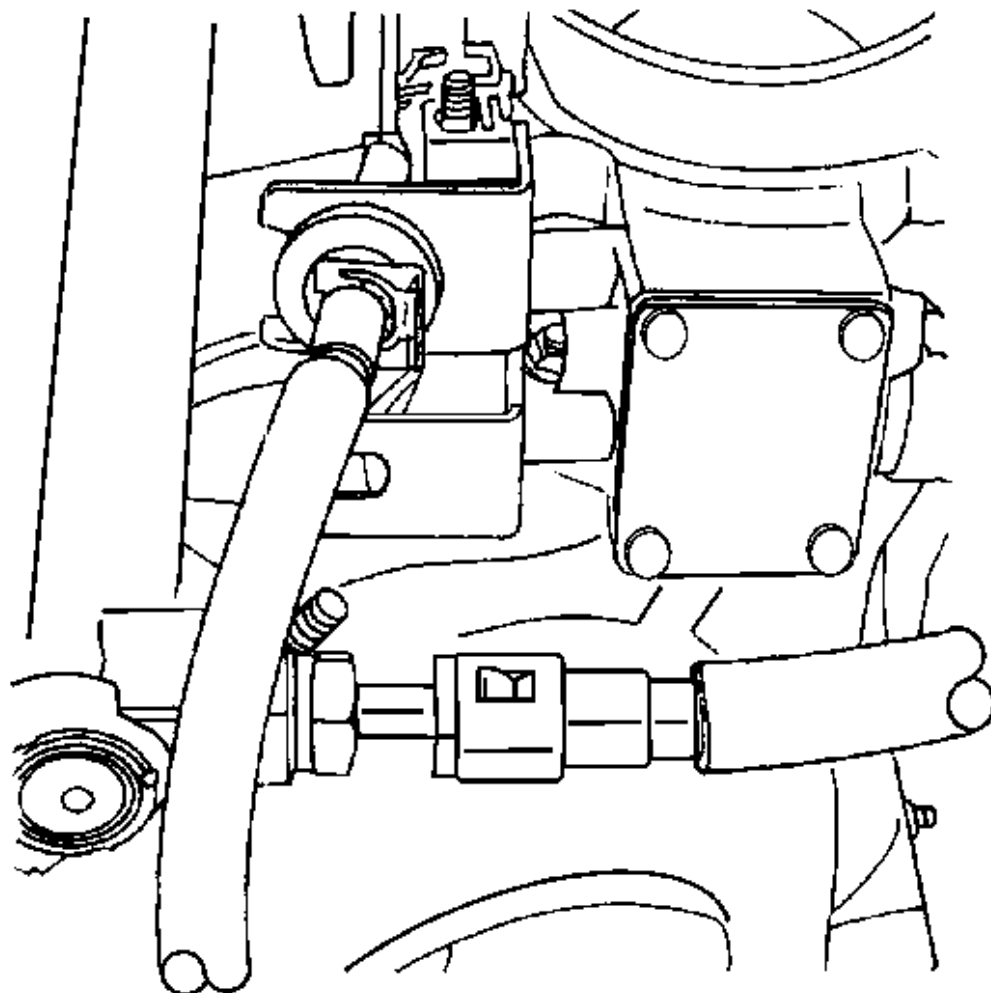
View Of Fuel Return Line And Fuel Feed Line
